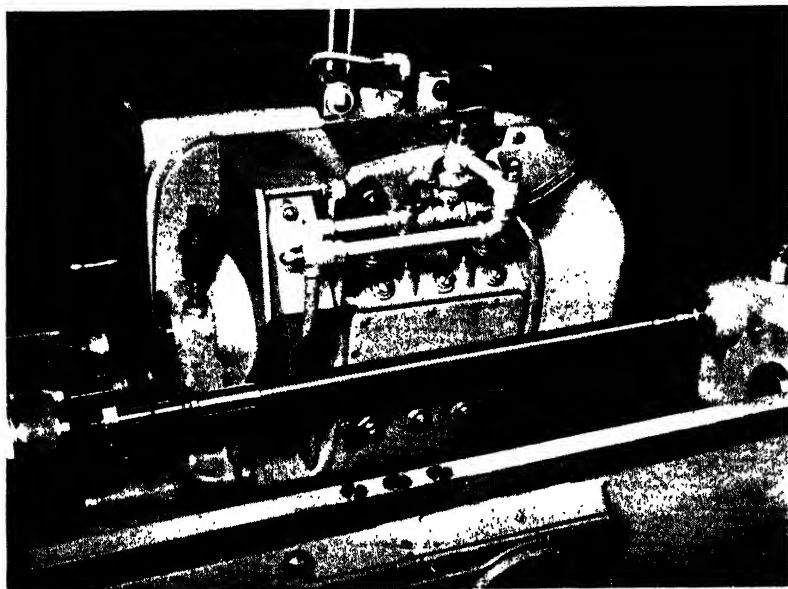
Grinding an External Thread on Outside of Clutch Barrel Rim
